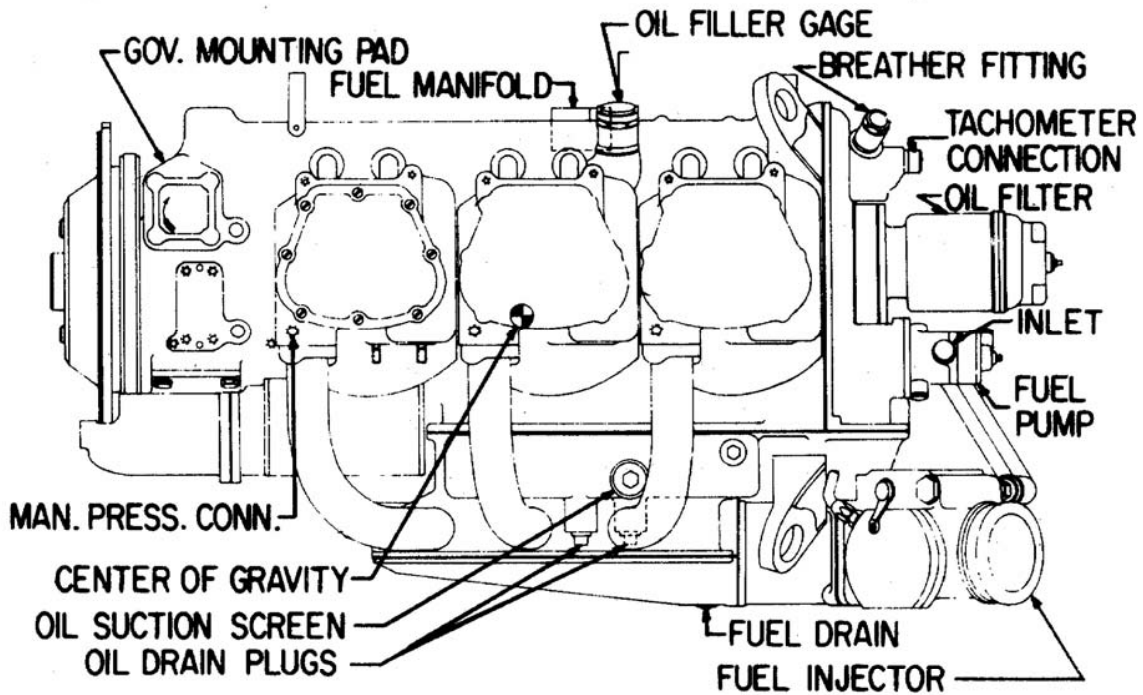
Installation Drawing - Left Side View - IO-540-K
